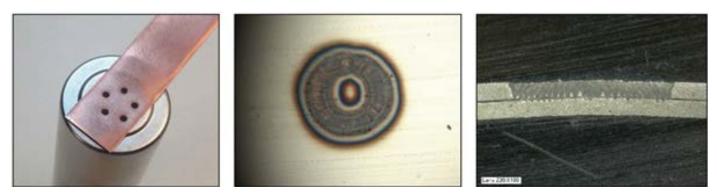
Nanosecond fiber laser applications. Left: Low volume battery tab welding, middle: top view of weld 20 micrometer thick foil, right: cross section of seam weld using the "wobble" function in 250 micron thick titanium.
